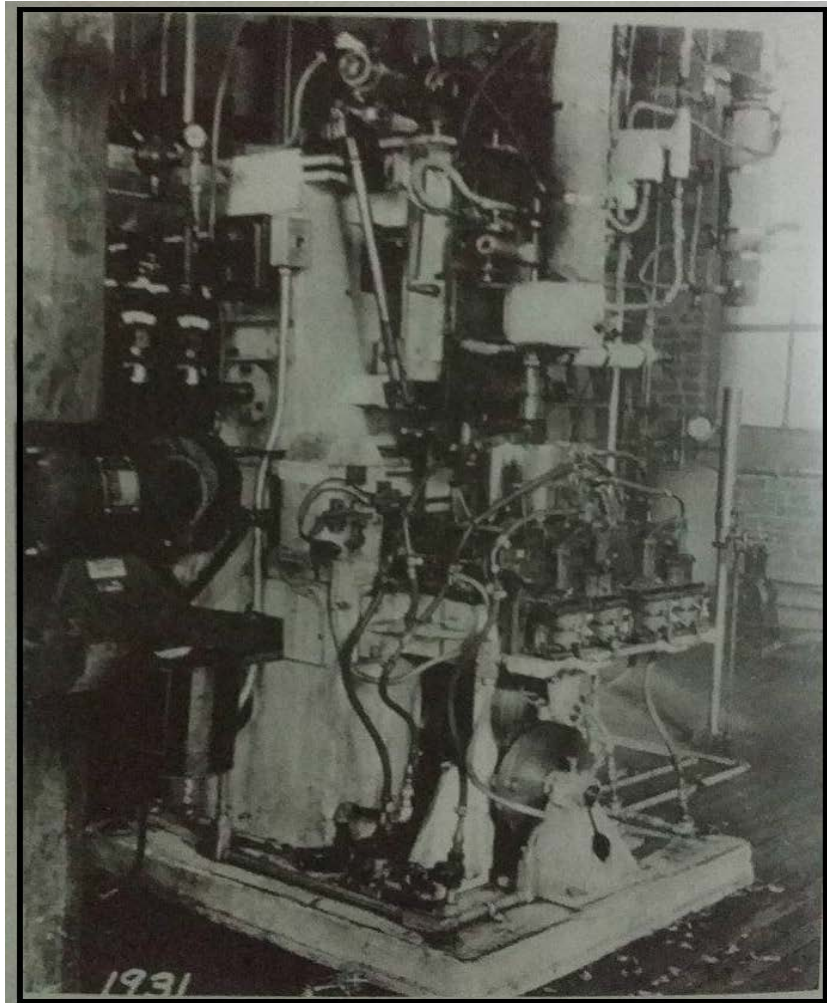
First Blow Molding Machine Developed by Plax in the early 1930s.
